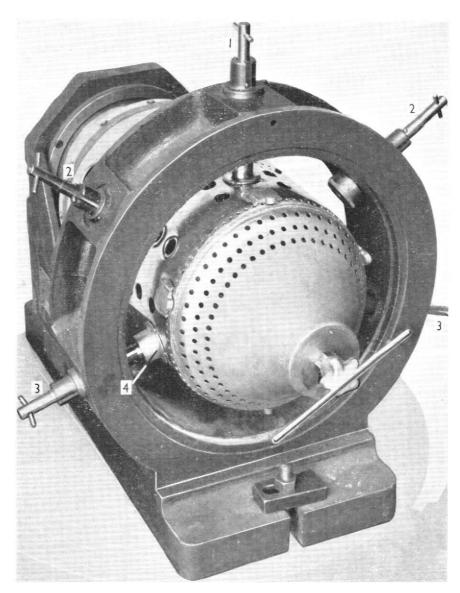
Flame tube and head assembled to welding fixture, and replacement interconnector sleeve tack-welded in position.
